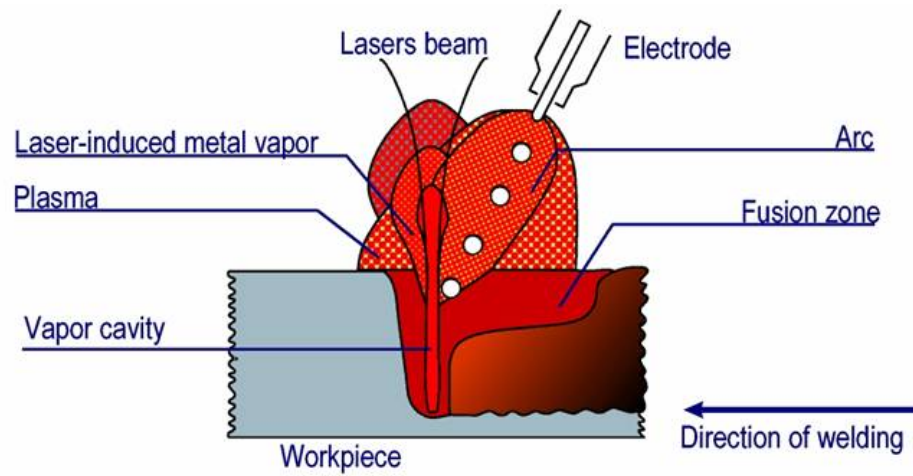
Schematic Diagram of Hybrid Laser/Arc Welding Process
